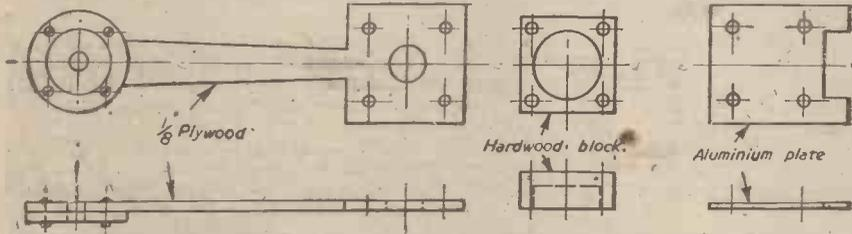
Details of radius arm, ball-race housing, and guide-plate. (Half full size.)
